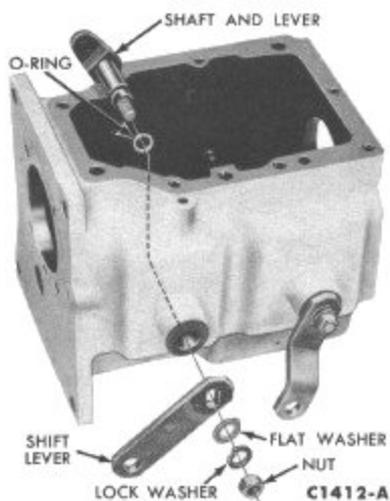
Shift Levers and Lever and Shaft Disassembled
